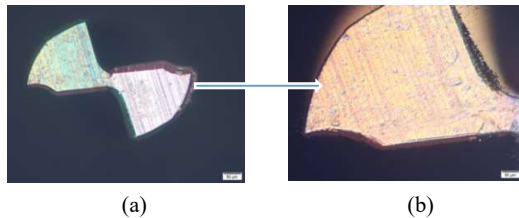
Optical images of (a) Micro end mill cutter and (b) cutter edge radius
